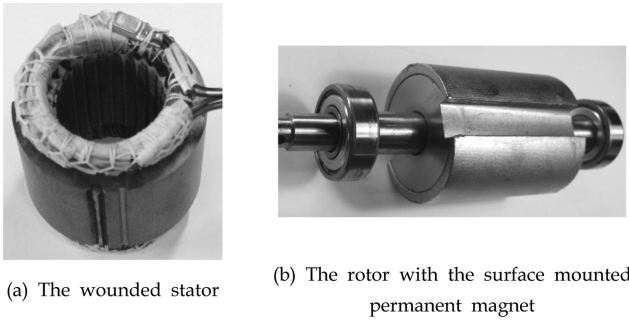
The manufactured prototype of the BLDC motor for the jet-fan.
